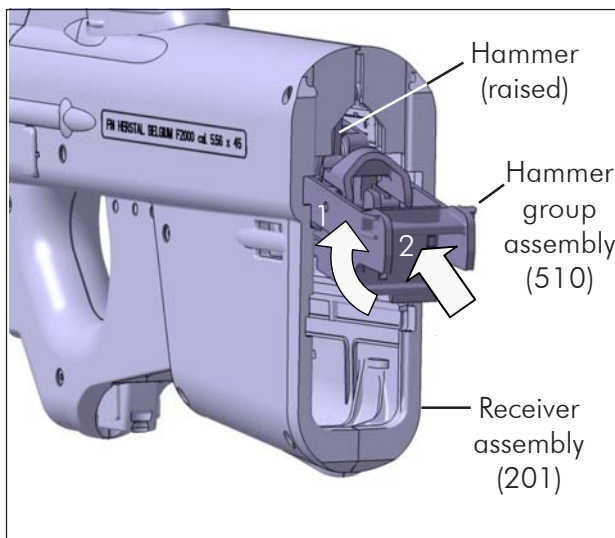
b - Inclining the hammer group assembly (510) downwards
